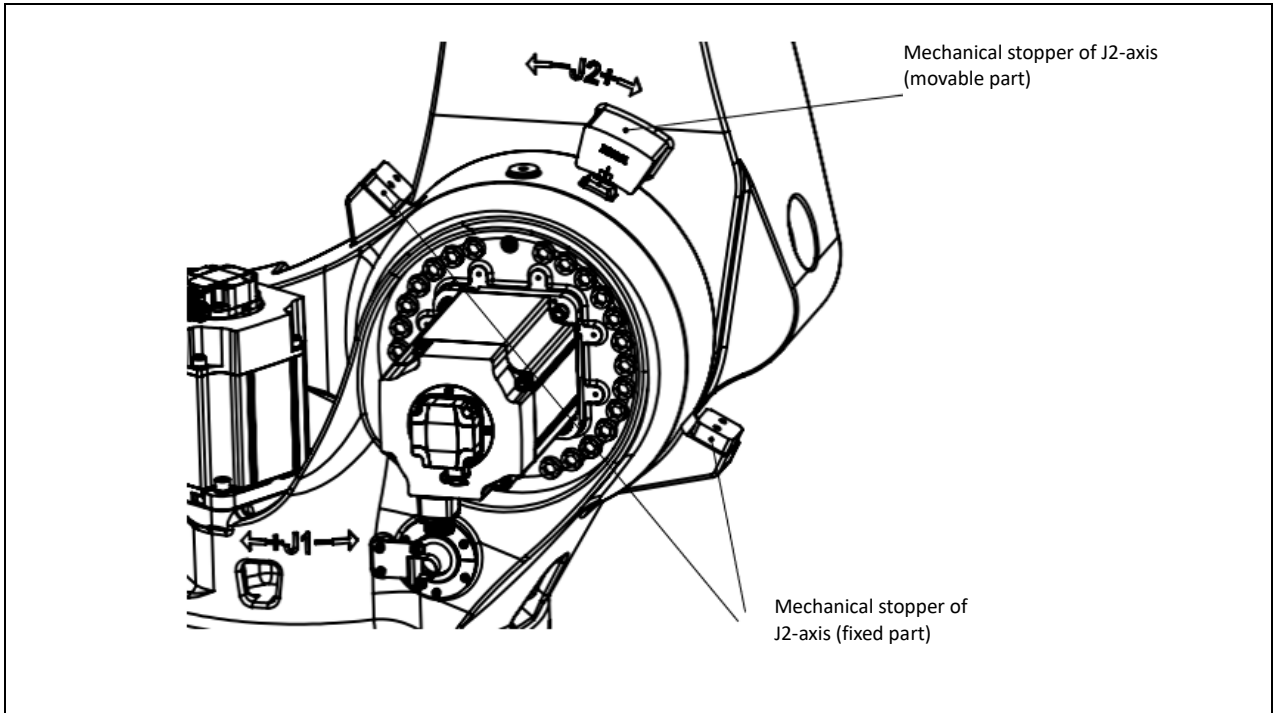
J2-axis mechanical stoppers (ER270-2700)
